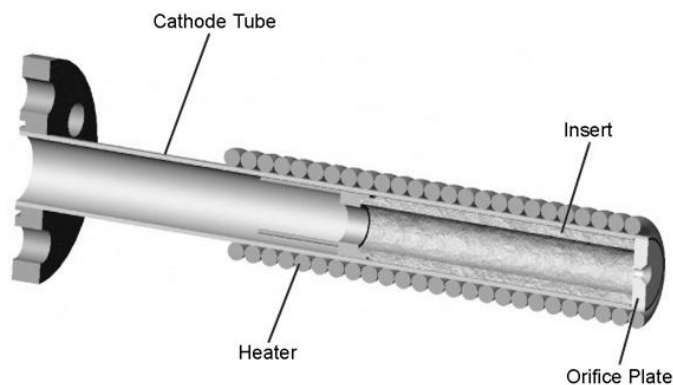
Typical hollow cathode geometry of a refractory metal tube with an emissive insert inside and a heater wrapped on the outside [24].
